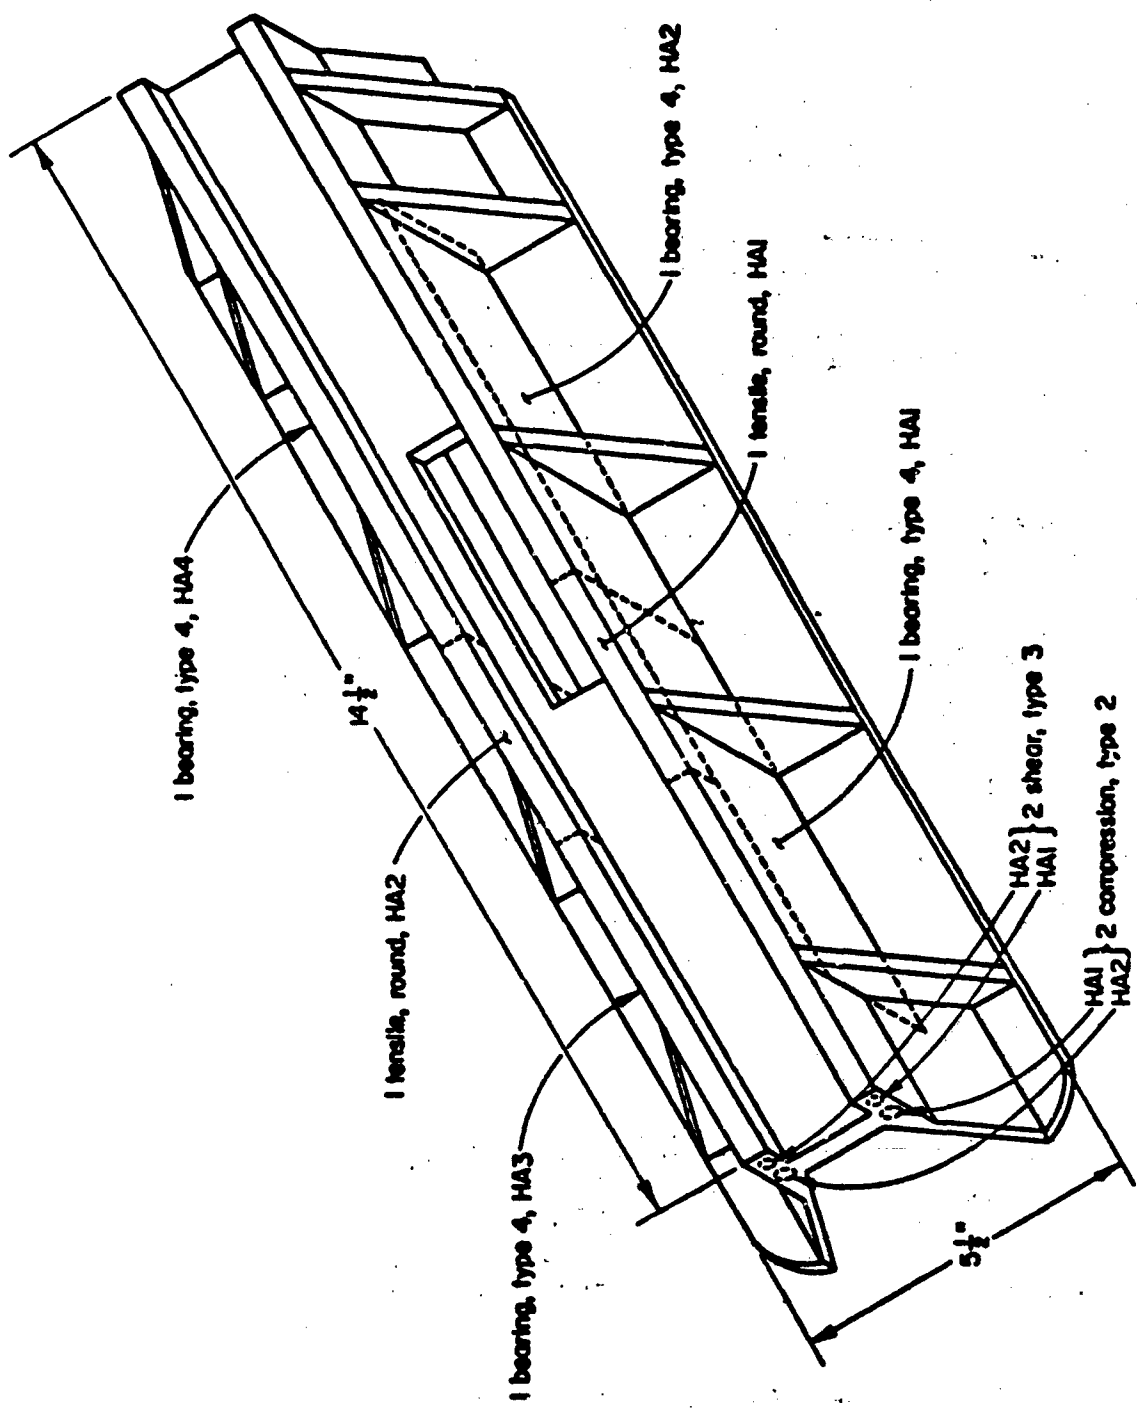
LOCATION OF TEST SPECIMENS FOR CASTING HA
